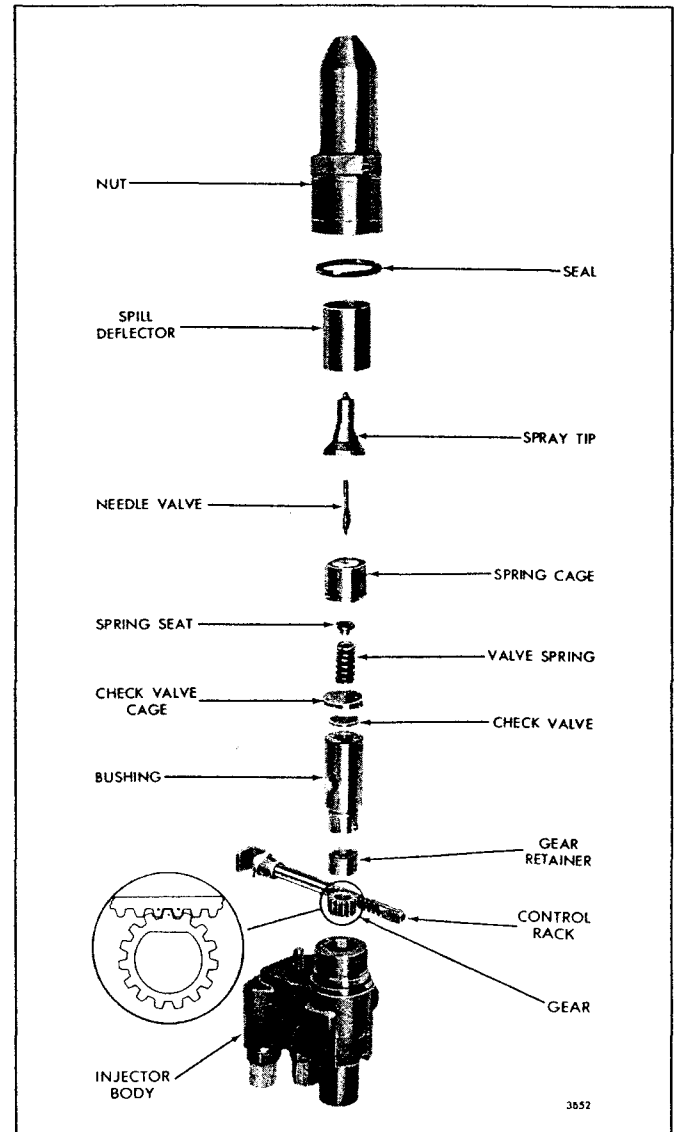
Injector Rack, Gear, Spray Tip and Valve Assembly Details and Relative Location of Parts
